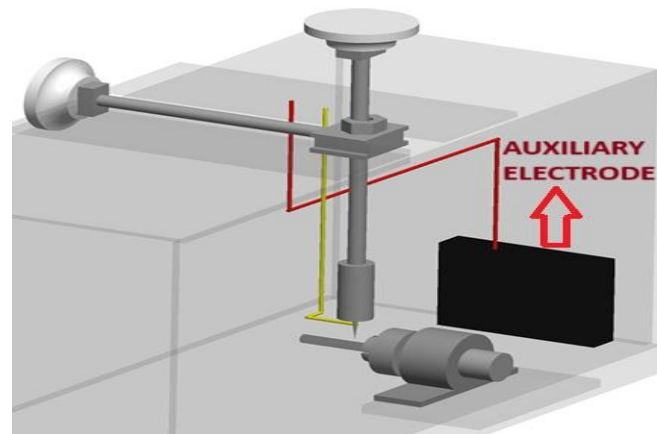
3D CAD drawing showing auxiliary electrode
